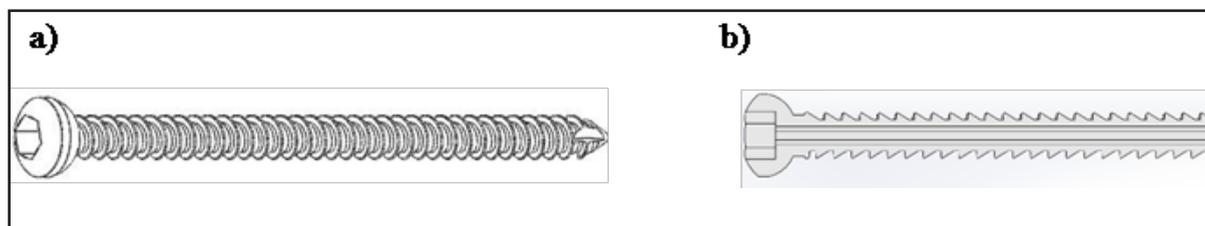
a) Cortical screw (HA 4.5); b) Section view of designed cortical screw
